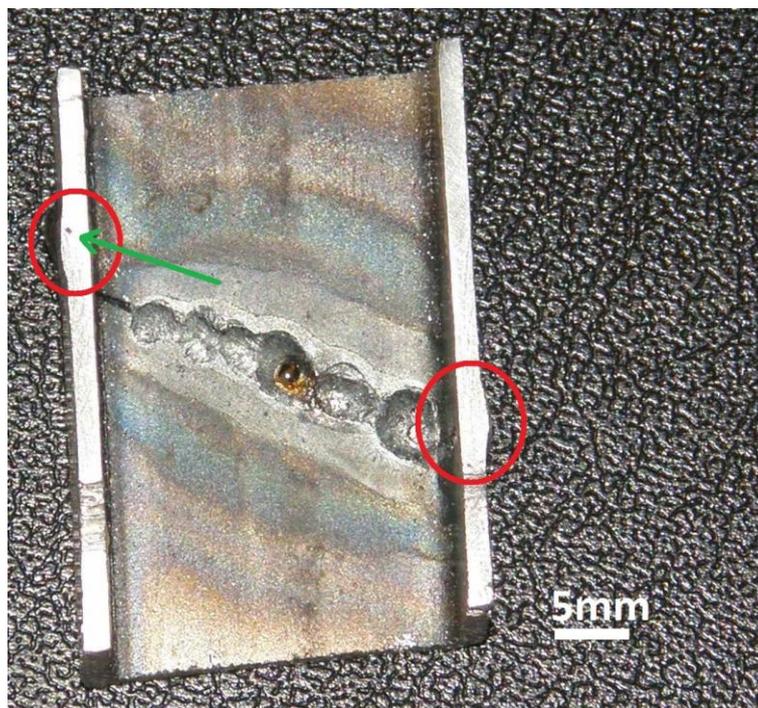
Weld sample, butt weld of square tube. Small defect indicated with green arrow
